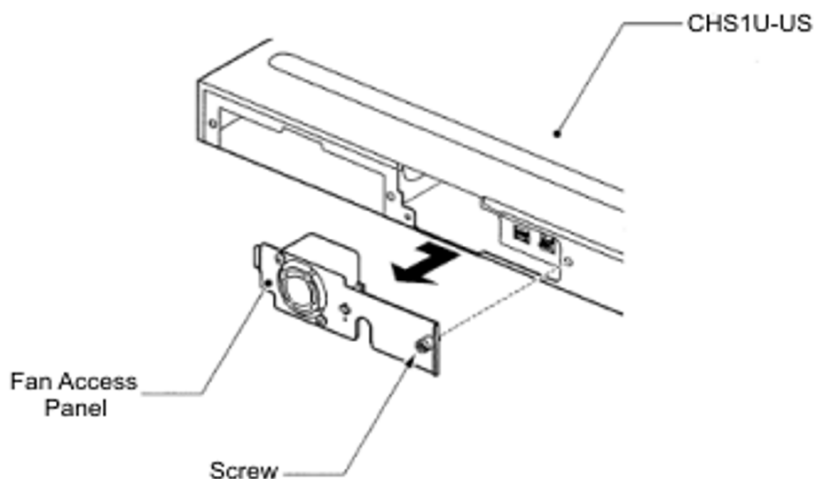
Removing Fan Access Panel CHS1U-AU
